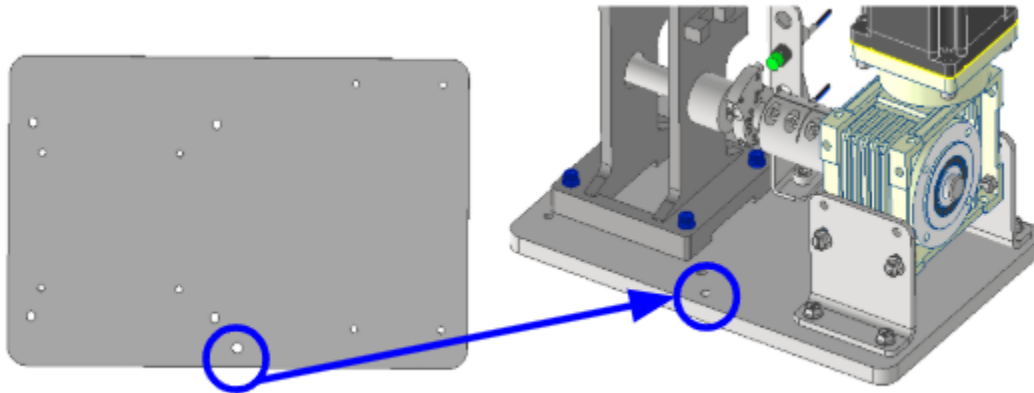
Base plate orientation, non-threaded hole to the front
